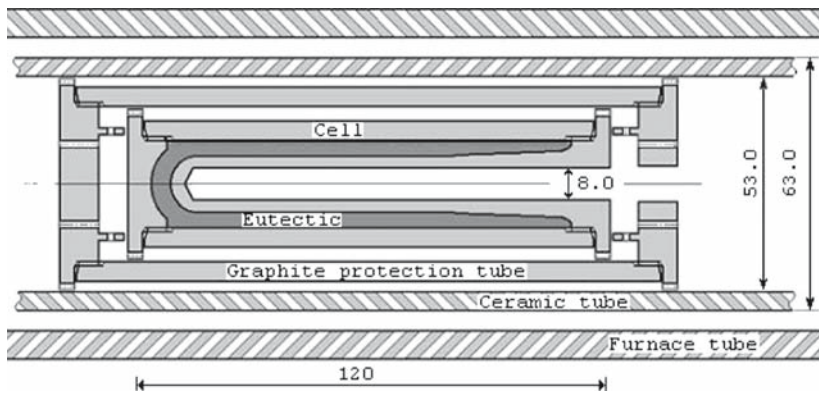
Ni–C cell assembly inside the furnace tube (dimensions in mm)
